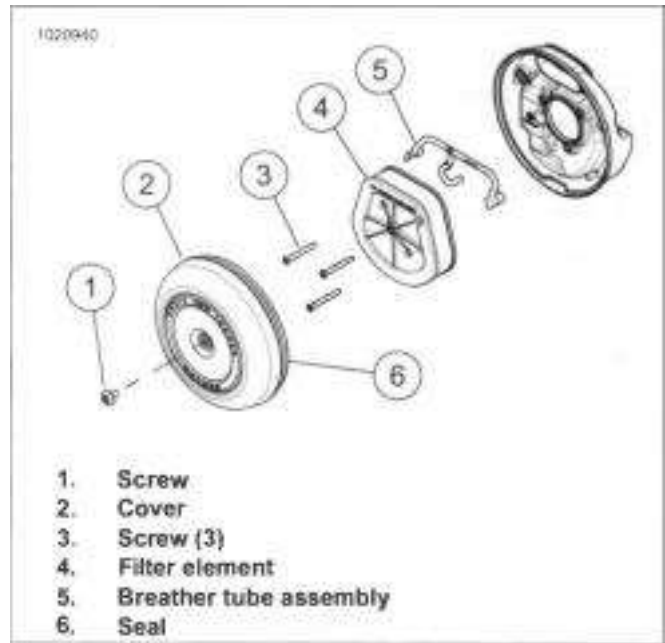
Replace Air Filter Element, Single Screw Cover
